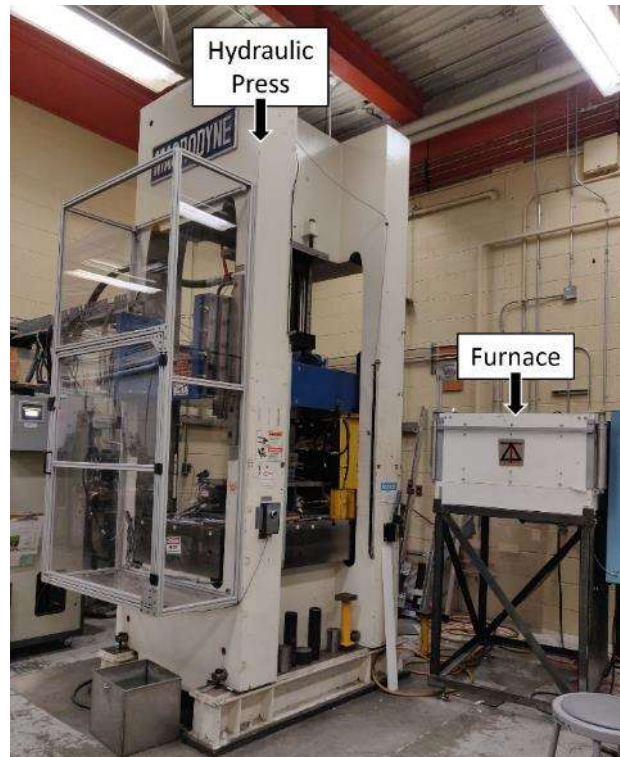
125 ton Macrodyne hydraulic press (left) and Deltech electric furnace (right) oriented for manual specimen transfer
